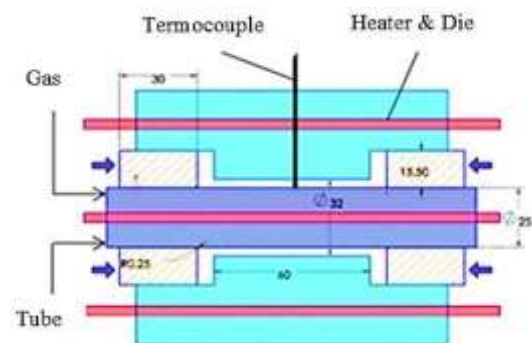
The die geometry, heaters, and tube (dimension in mm)
